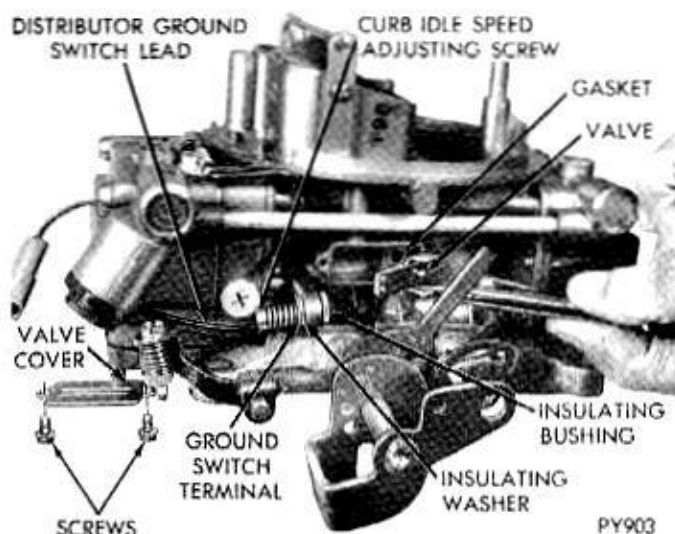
Removing or Installing Hot Idle Compensator Valve
